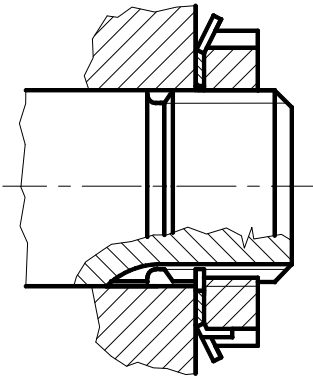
Drawing a connecting male and female thread in section having a keyway
